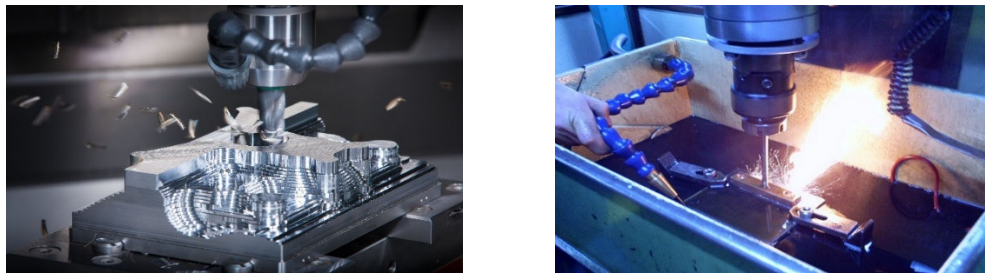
(left) CNC machine (Aleck, 2015), (right) EDM machine (Gestion De Compras)
